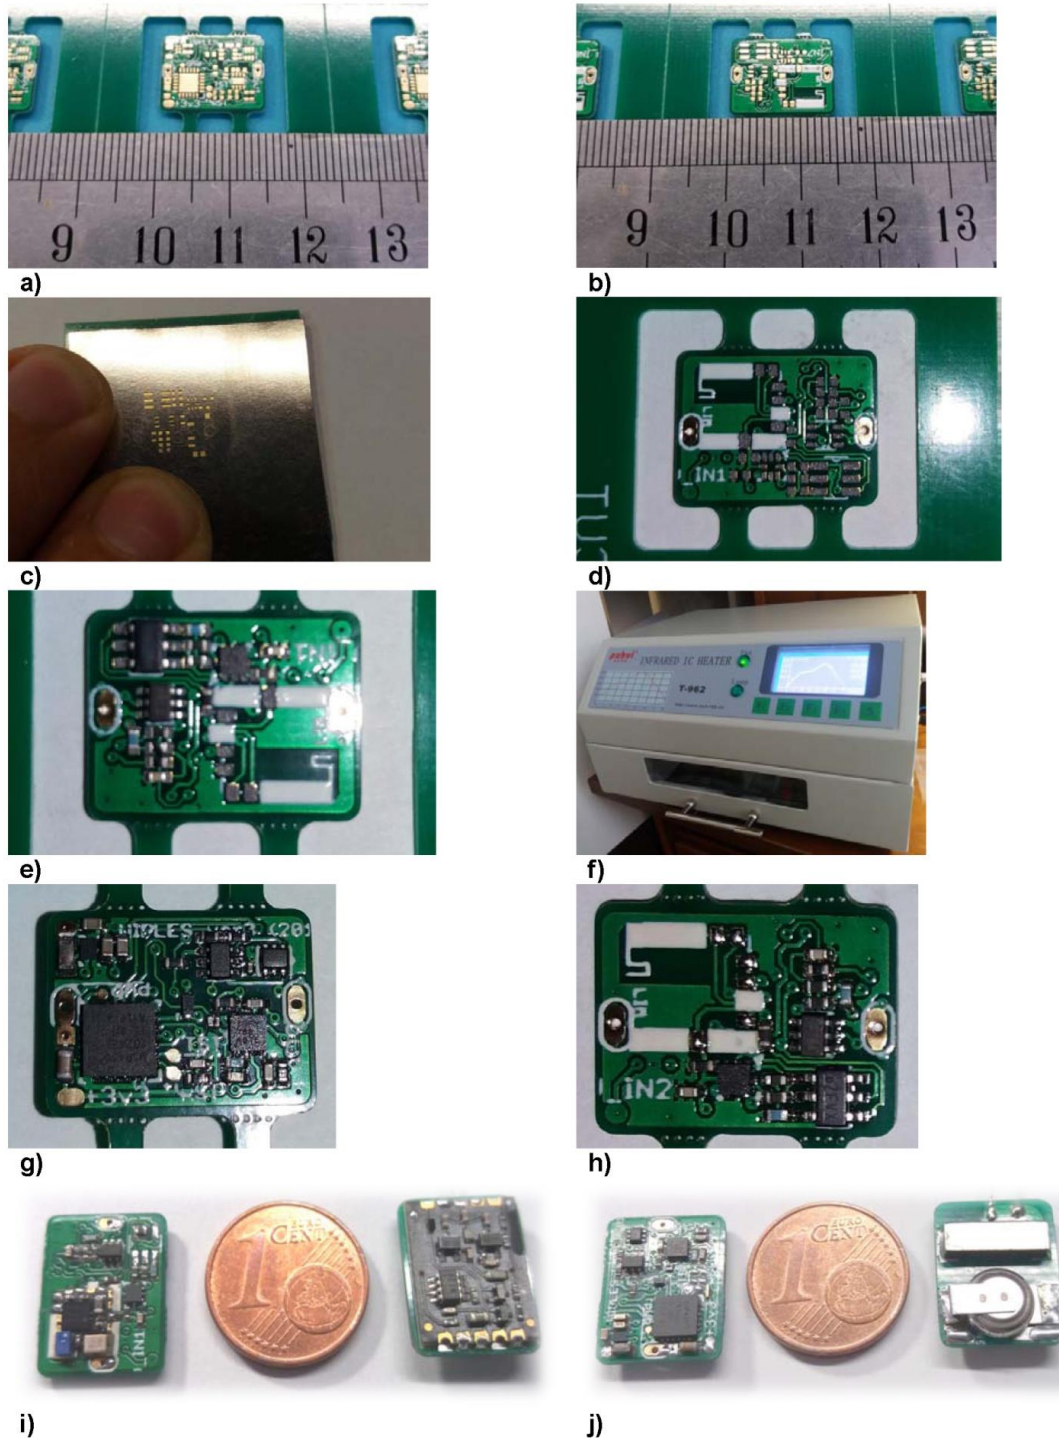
Step-by-step assembly of a printed circuit board: a) ready main PCB, top view; b) ready main PCB, bottom view; c) solder stencil matching; d) applied SMT solder paste; e) electronic components placed; f) SMT oven type IC HEATER T-962; g) soldered main PCB, top view; h) soldered main PCB, bottom view; i) assembled prototype (3 boards), top view; j) assembled prototype (3 boards), bottom view.
